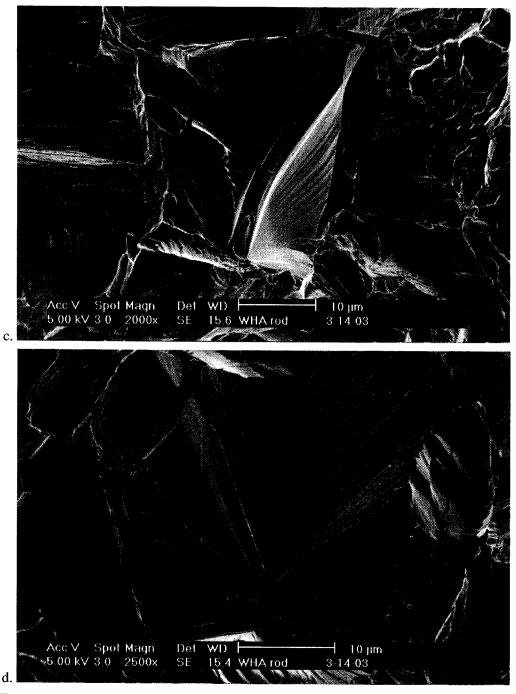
Fracture surfaces of W-Ni-Co alloy.
